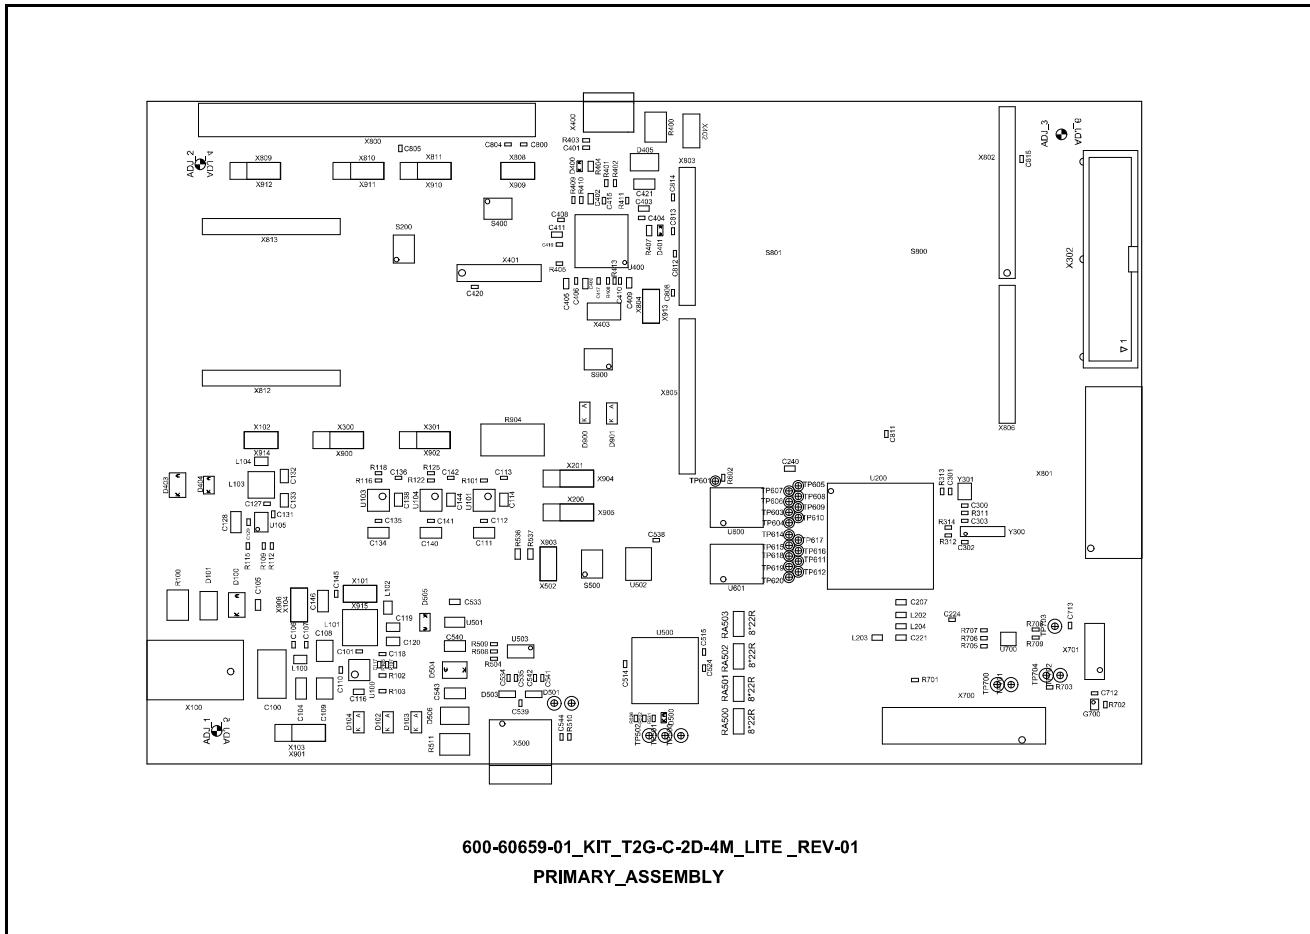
Primary assembly drawing of TRAVEO™ T2G Cluster 4M Lite kit
